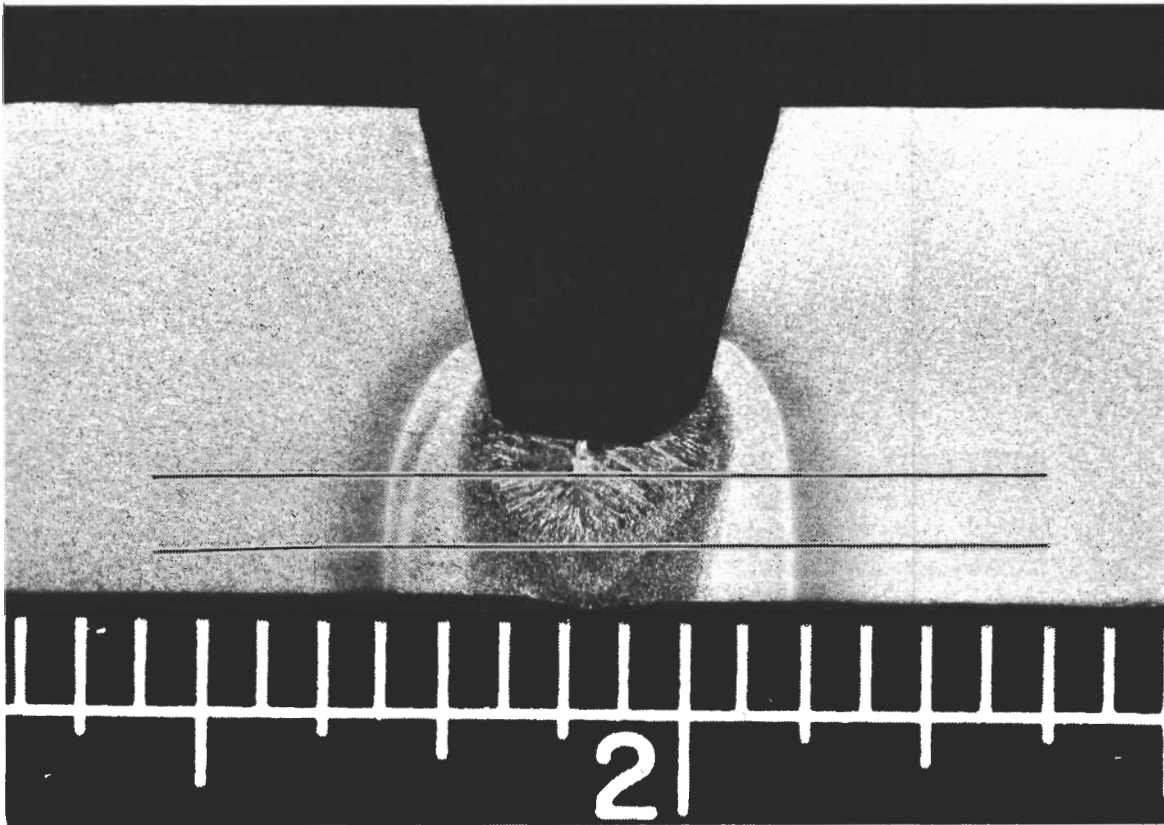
Typical Results of Microhardness Evaluations of Grade 250, 1/2-In.-Thick, 18% Nickel Maraging Steel Plate Weldments Using TIG Process, As Welded with One Weld Pass, Heat 120D163, Filler Wire 7C-093
